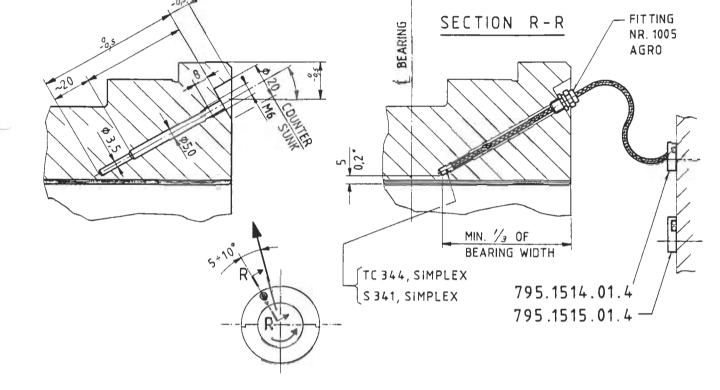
Technical details of embedded type TC and RTD's in radial bearings
